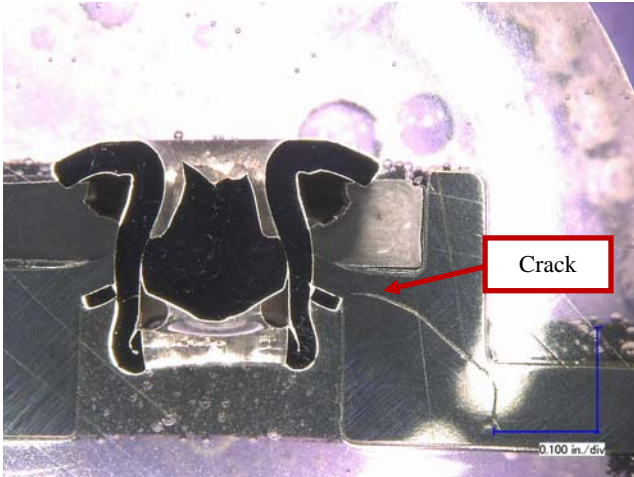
The cross-section prepared through the riveted hinge showed that the cracking extended from relatively sharp edges within the metal fastener.
